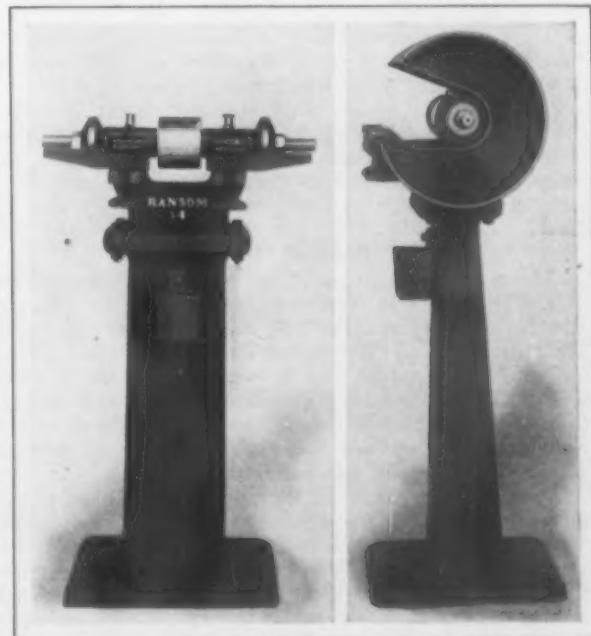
Equipped with Plain Rests      Fig. 2—Equipped with Wheel Guards
